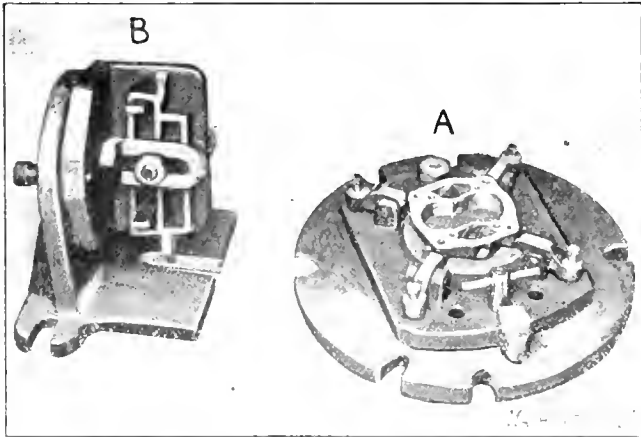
Fixture for Milling Quadrants, and Oil Pump Casing
